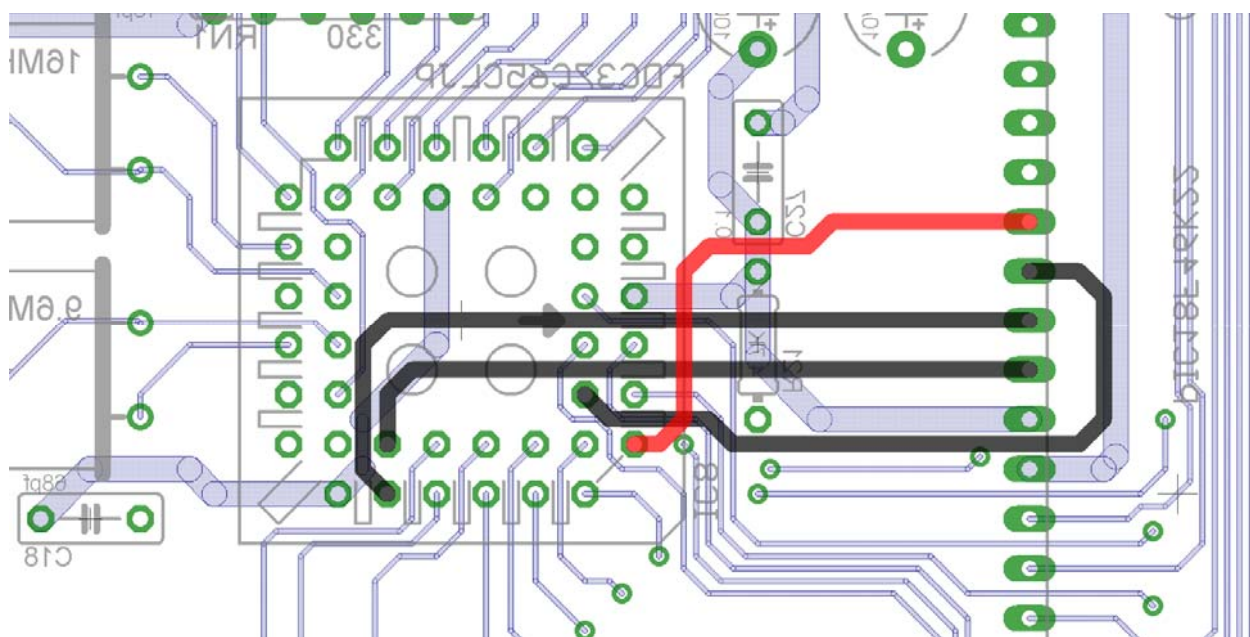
Air-wires to solder (view from PCB's solder side)
